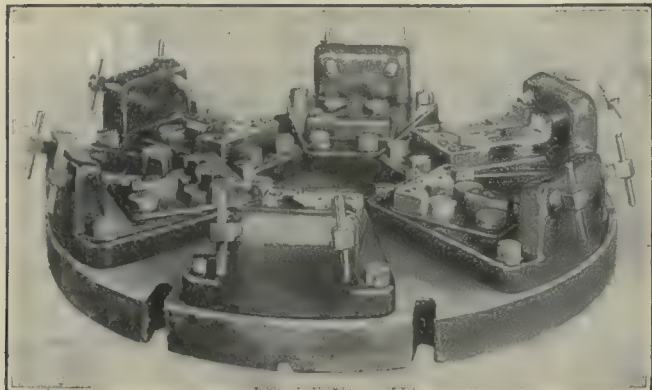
FIXTURE FOR MILLING FLANGED LINKS
